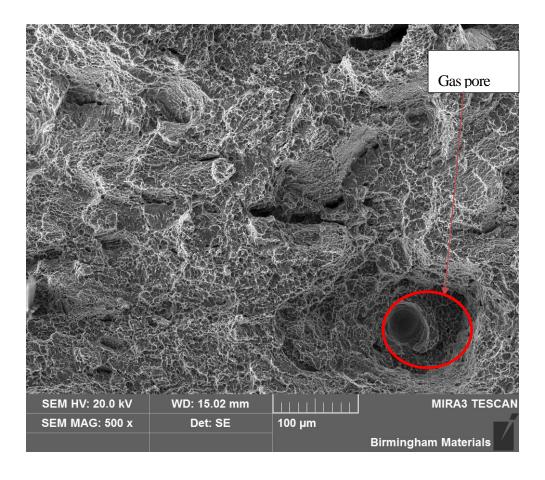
EIGA as-built fracture specimens indicating gas pores.
